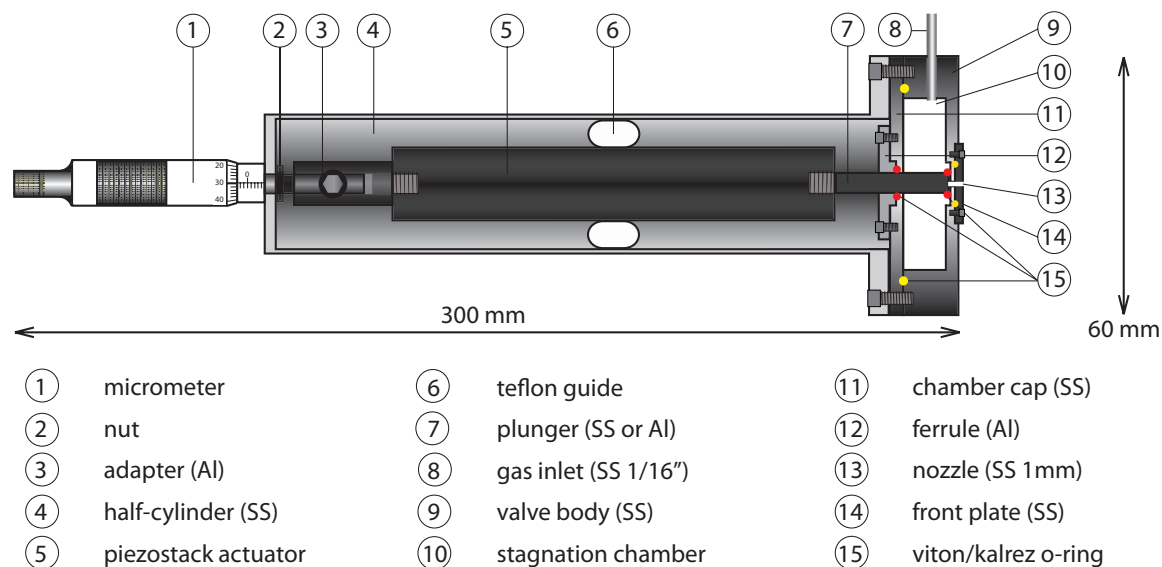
Schematic view of the valve assembly. The Piezostack actuator is mounted and aligned outside of a stainless steel valve body in a half-cylinder. The valve is sealed by Kalrez o-rings both at the tip and at half-length of the plunger. Other o-rings are shown in red.
